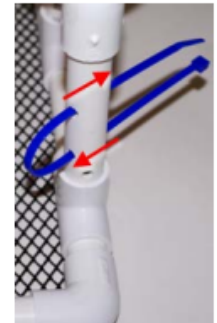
Tie Wrap Threaded Through Thruster-Mounting Holes
